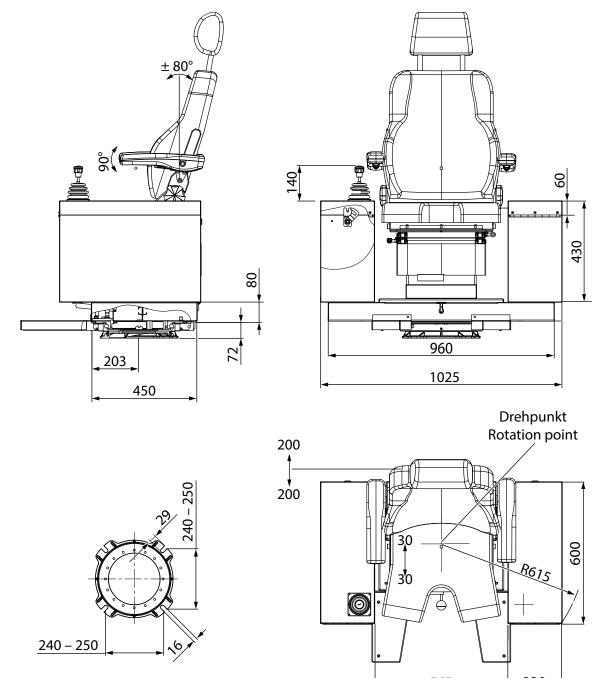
Control stand SV1C Basic-Line: Dimension drawing 2 (dimensions in mm)
